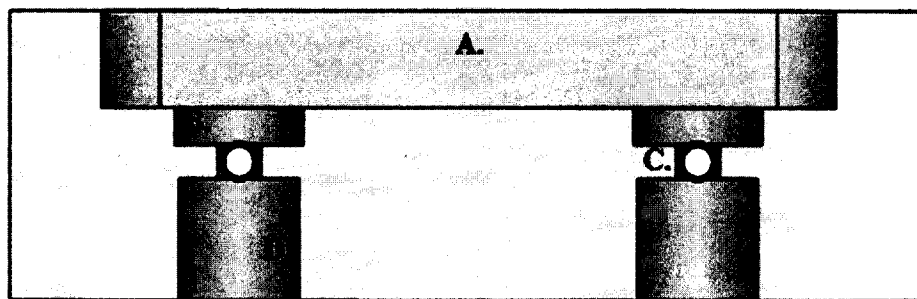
Cross-sectional view of computer-aided drawing of the assembled first prototype. The AAO membrane (A) was placed between the two parts of the sensor casing. The USB-pressure transducer (B) was threaded into the bottom of the assembly. Two injection ports (C) were drilled into the casing for the loading of the internal solution and evacuation of air; after the internal solution was loaded, the ports were sealed off with a sealing screw (on the right) (sealing screw is not shown on the left). A bleeding port (D) was added to allow for pressure relief during the loading phase. The external solution was pumped through the sensor via channel (E) located in the top half of the casing.
